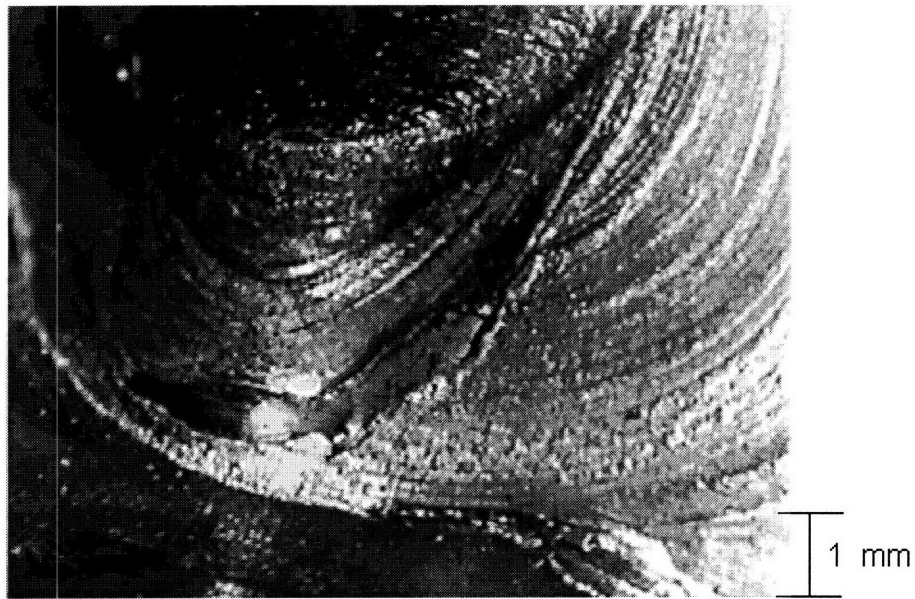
Specimen 1 fractured weld toe.
